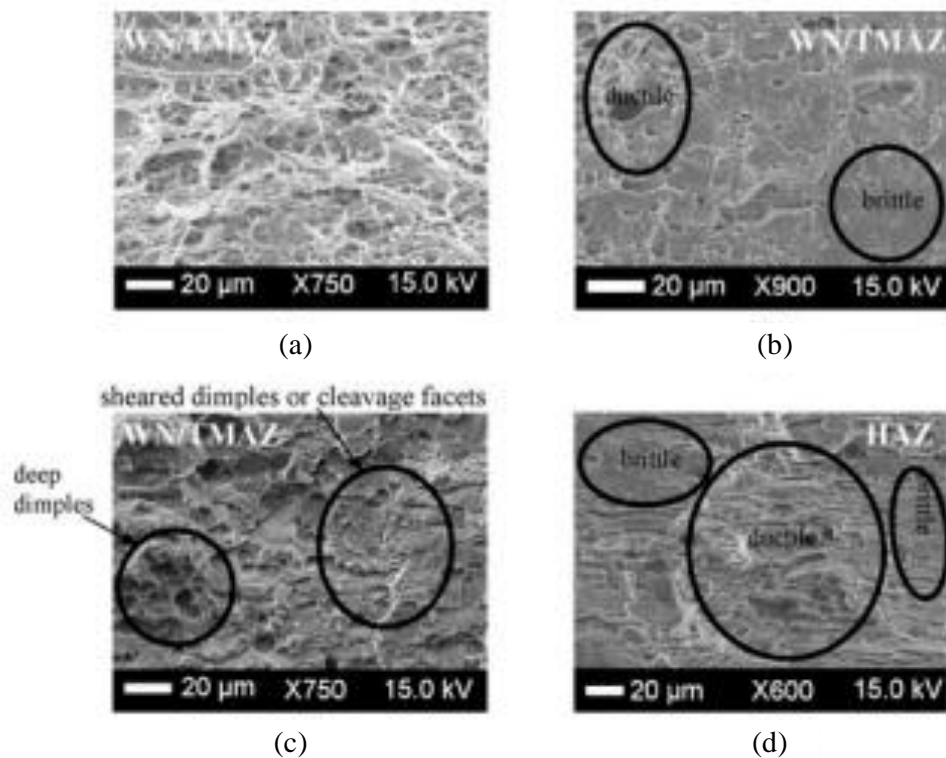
Fracture surfaces of sample welds from some configuration [117].
